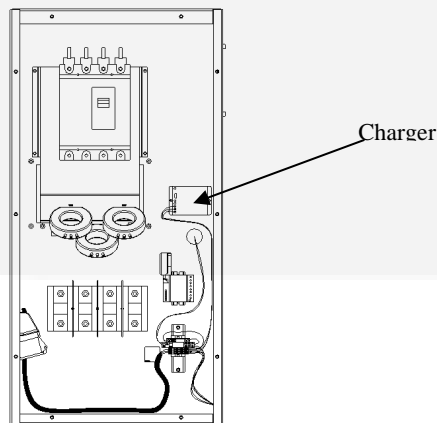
View of control housing with front panel removed (C70 to C200 sets)
